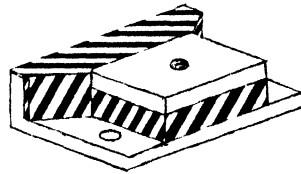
ANGLE BRACKET TYPE OF MOUNTING
